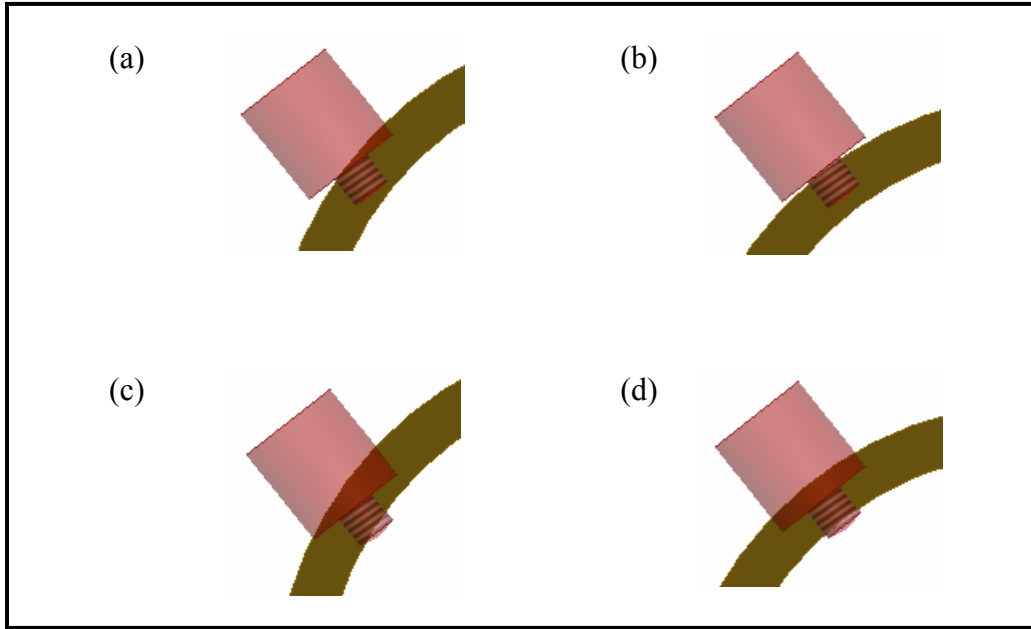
Examples of faulty tool/workpiece contact. (a) Insufficient contact due to tool tilt (b) Insufficient contact due to insufficient plunge depth (c) Excessive contact due to tool tilt (d) Excessive contact due to excessive plunge
